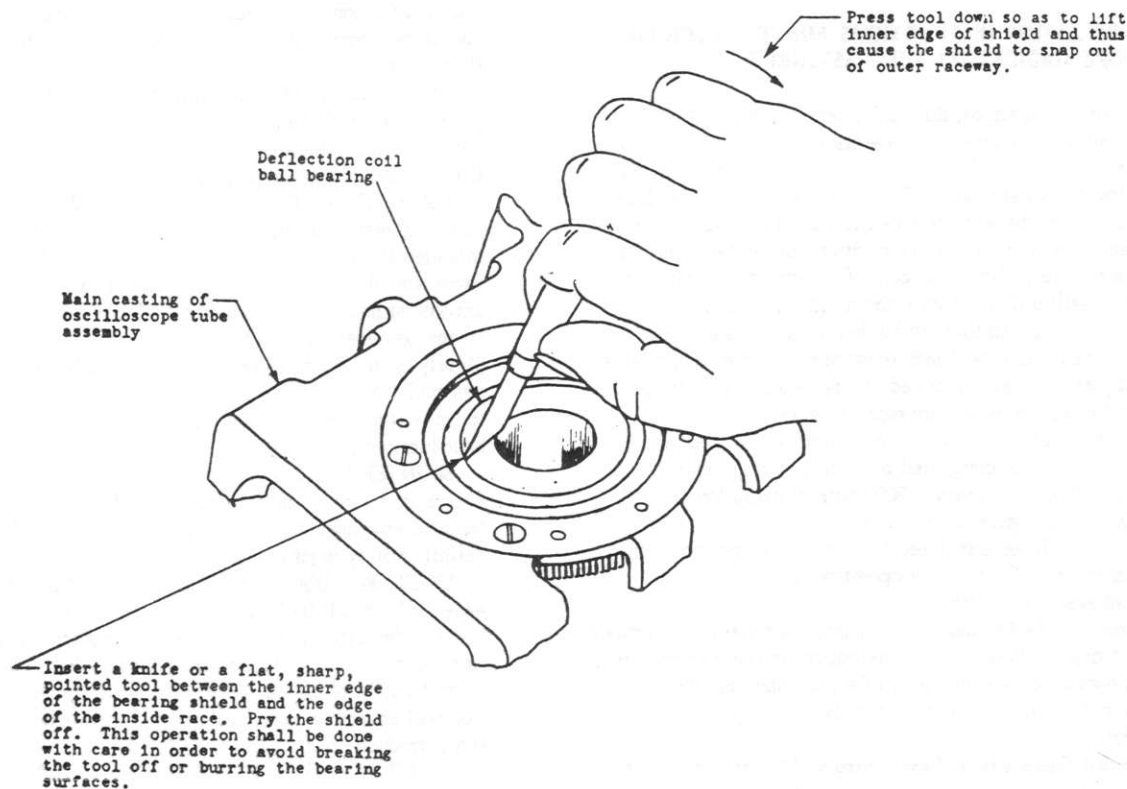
Method of removing shield from deflection coil ball bearing.
